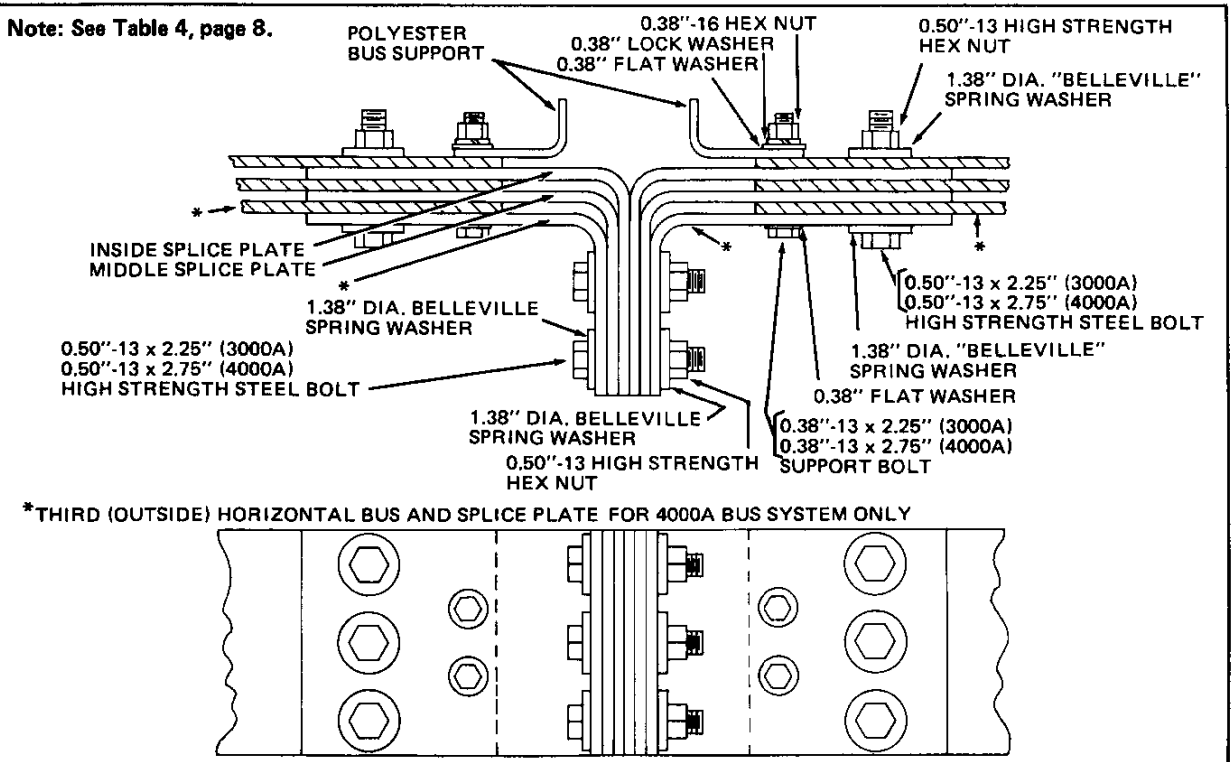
Field Assembly of Joints in 3000 Amp and 4000 Amp Copper Horizontal Bus
